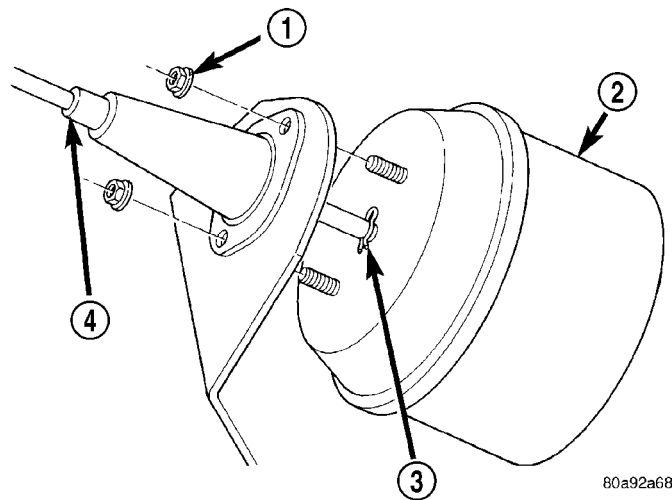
SERVO CABLE CLIP REMOVE/INSTALL - TYPICAL
